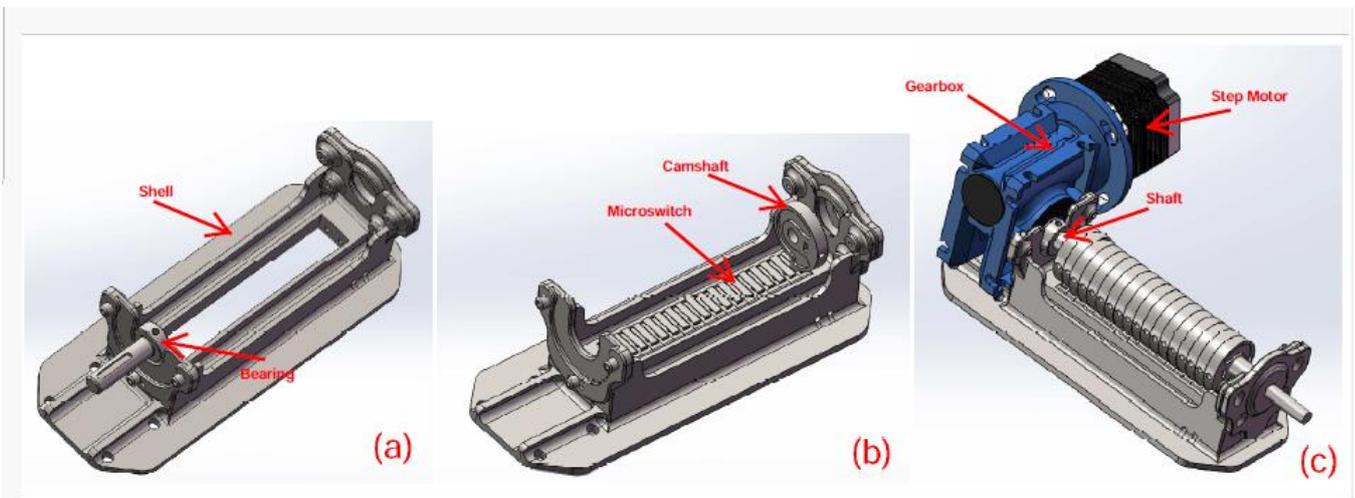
a) The shell and bearing of the presented mechanism. b) Placement of 18 micro switches and a camshaft on the shell. c) The developed mechanical system to control micro switches and solenoid valves that consist of the camshaft, micro switch, gearbox, and step motor
